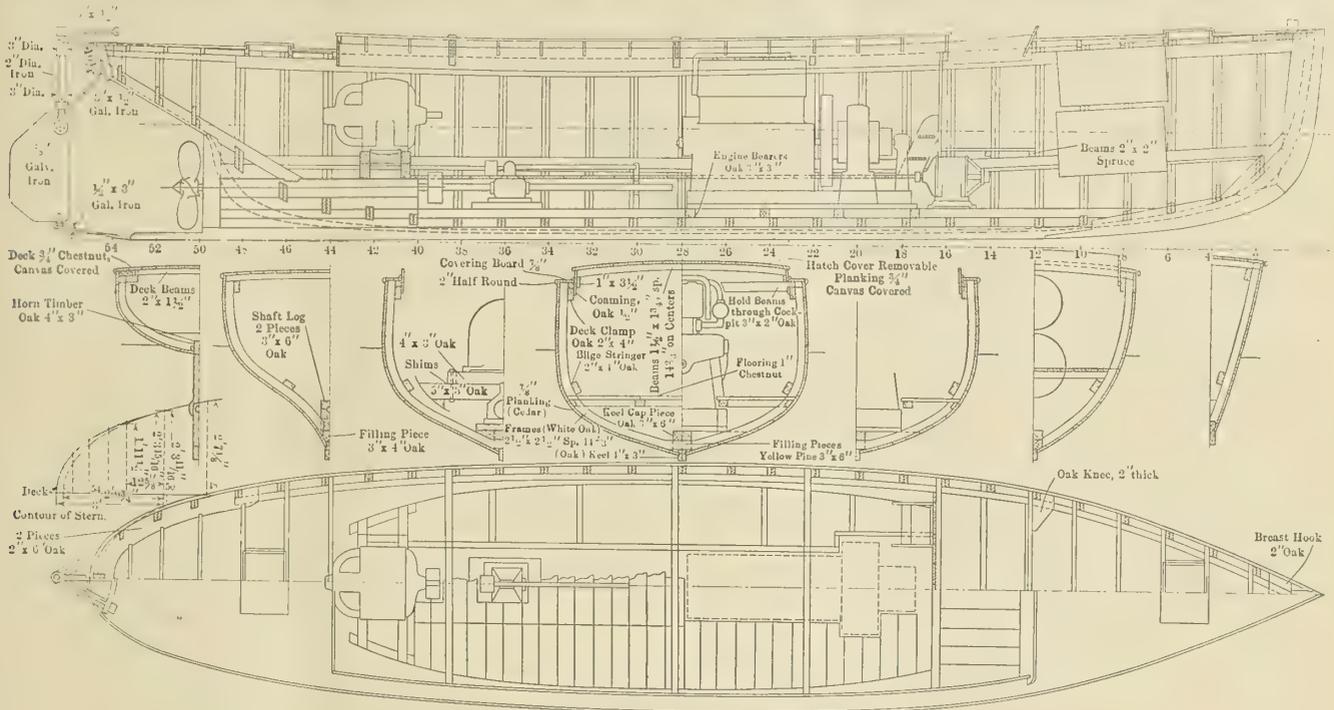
CONSTRUCTION PLANS OF THE FULTON
